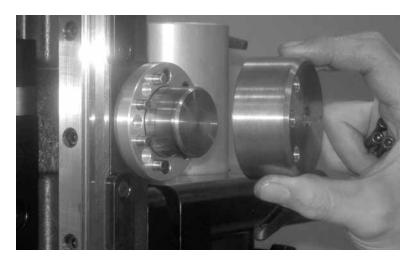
Place the feed lock clamp on the housing with the feed lock lever at the bottom.
